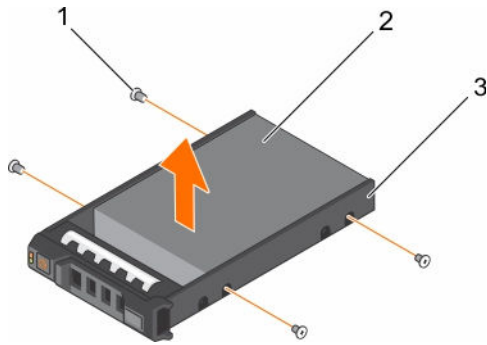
Removing and installing a hot swappable hard drive into a hard drive carrier
